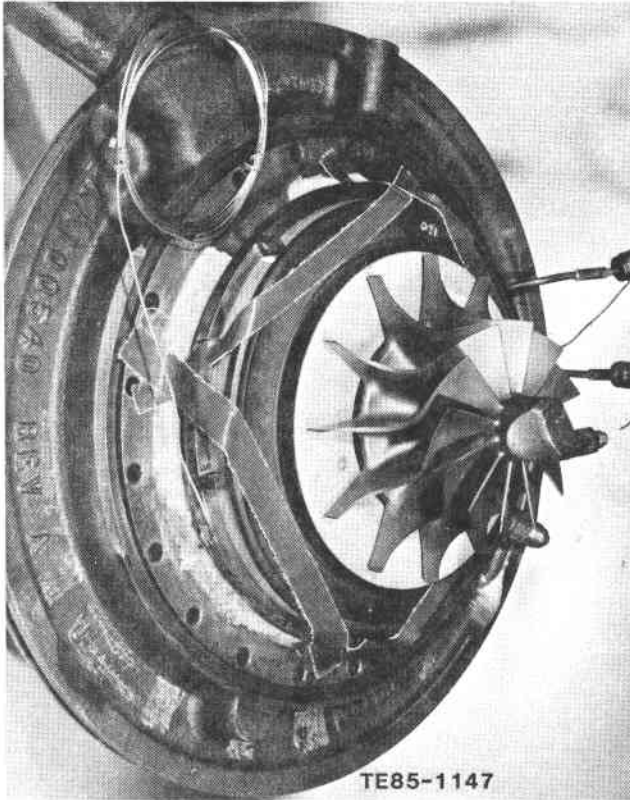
Ceramic gasifier rotor (S/N FX34286) assembled in engine S/N 2 bearing support.
